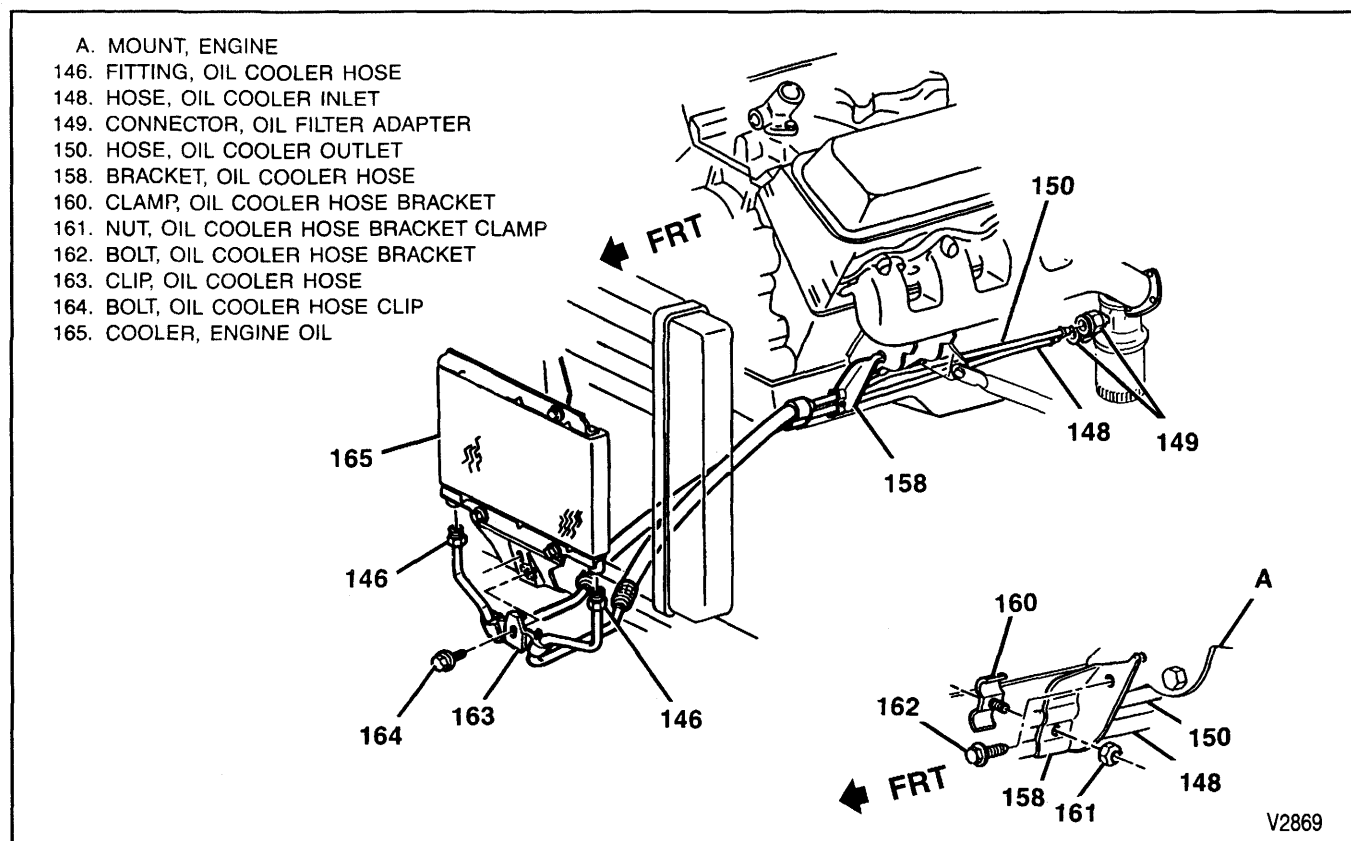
Engine Oil Cooler Lines and Components (5.7L Engine with H.D. Cooling)
